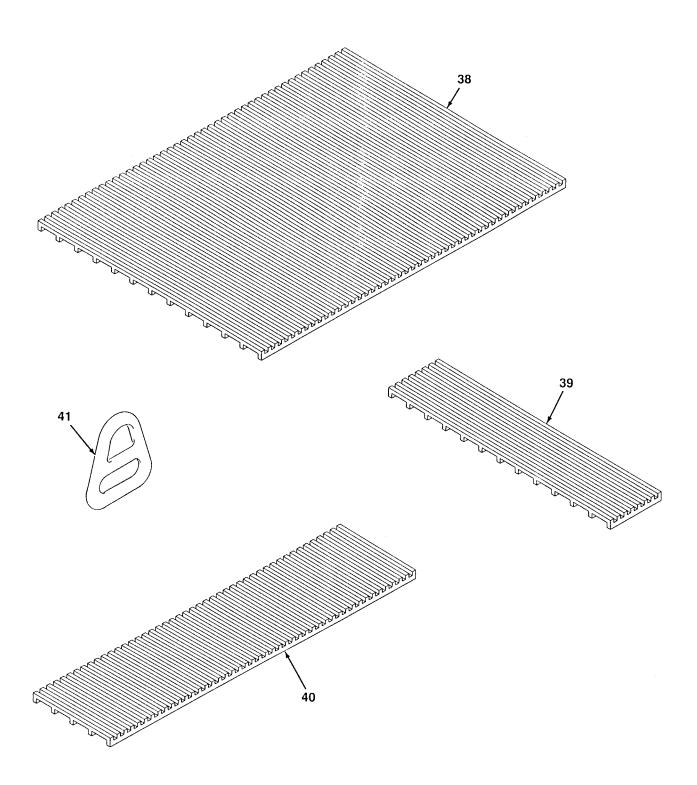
Trailer Assembly Components (Sheet 2 of 2)
